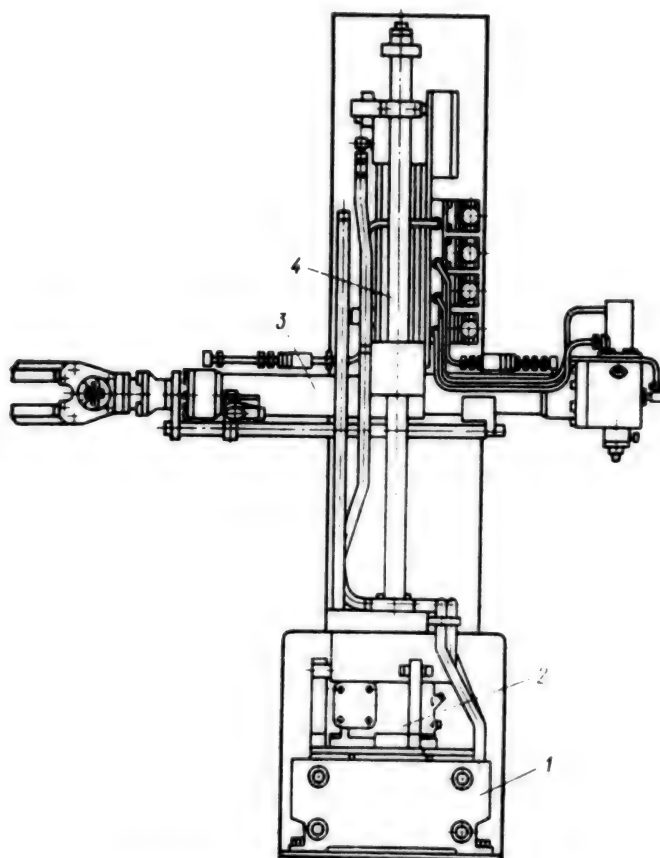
Remover Manipulator for Casting in Automated RM-2 Floor-Type Pressure Die Casting Complexes
